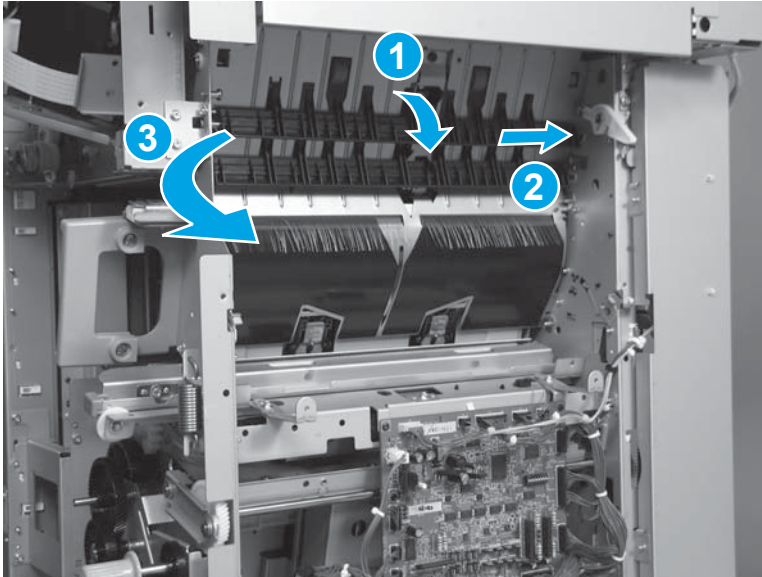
Remove the saddle rear end sensor assembly (4 of 10)
